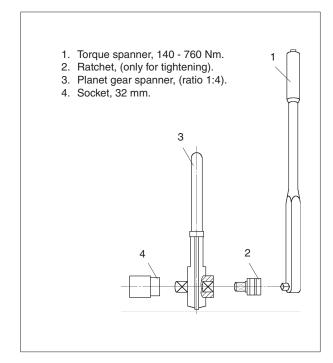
Tools combination for tightening of lower screws with planet gear.
